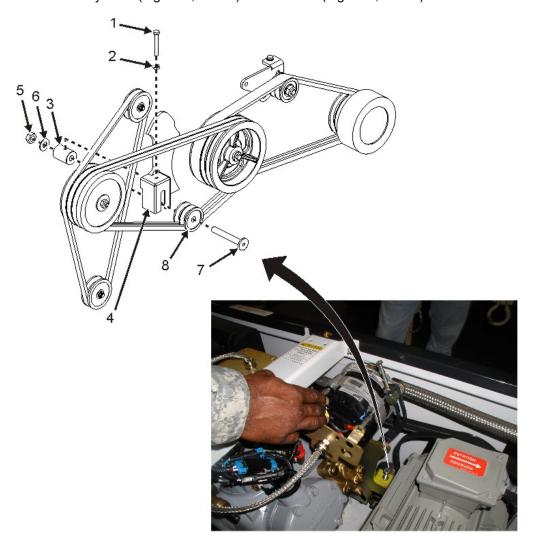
Standby Motor to Compressor V-Belt Idler Pulley.
